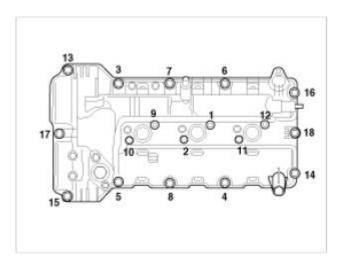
Identifying RH Cylinder Head Cover Mounting Bolts Tightening Sequence
